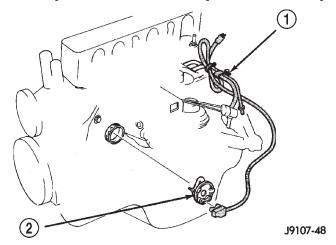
Heater and Cord— 2.5L 4-Cylinder Engine
